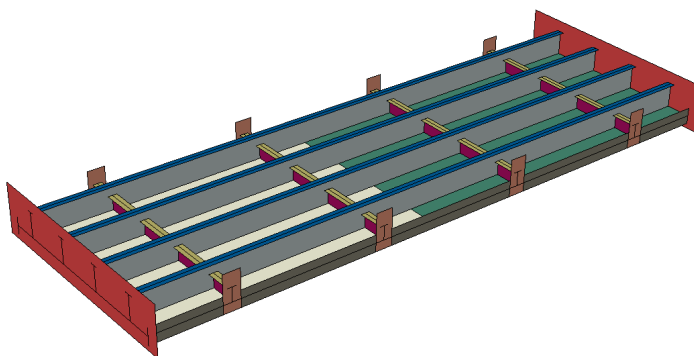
Varying bottom plate field with longitudinal girders (LG1)
